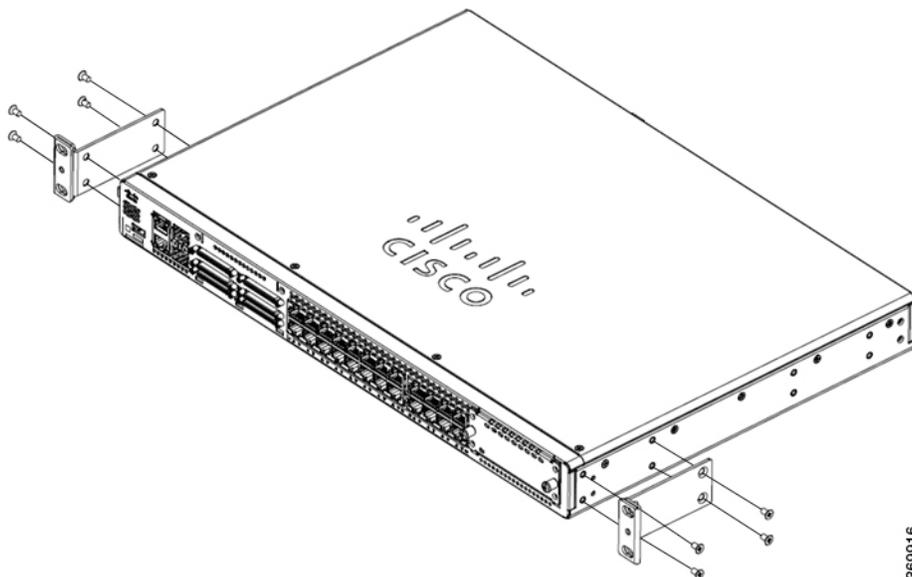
C1100TG-1N32A – 23" Bracket installation for rack mounting
